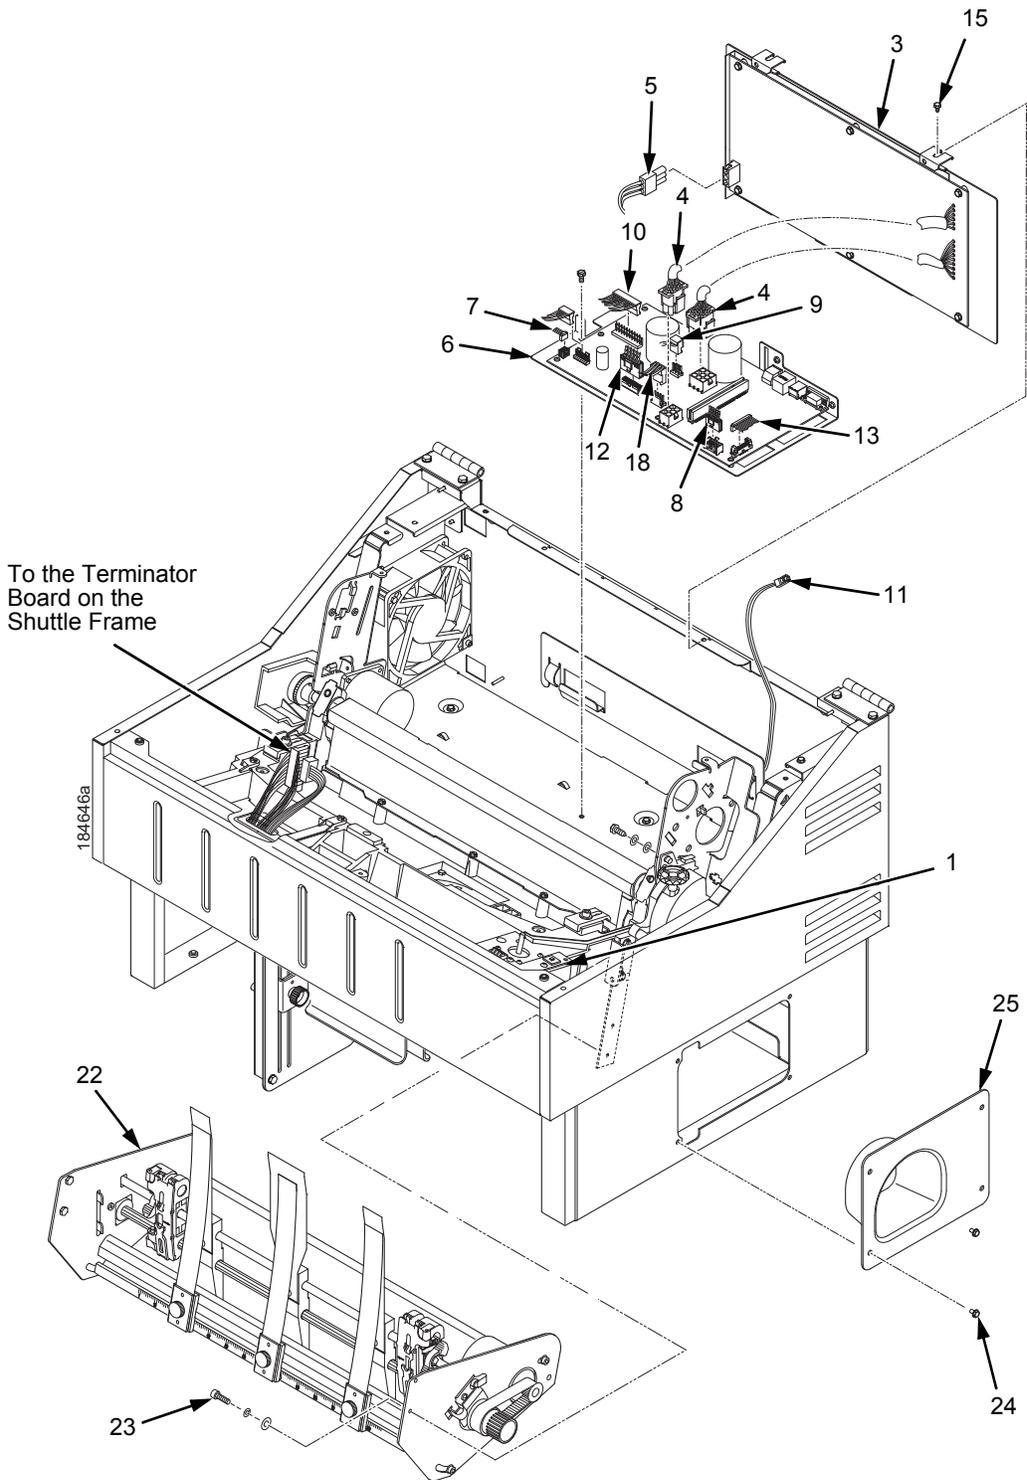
ZTP Circuit Boards and Paper Feed Assembly
